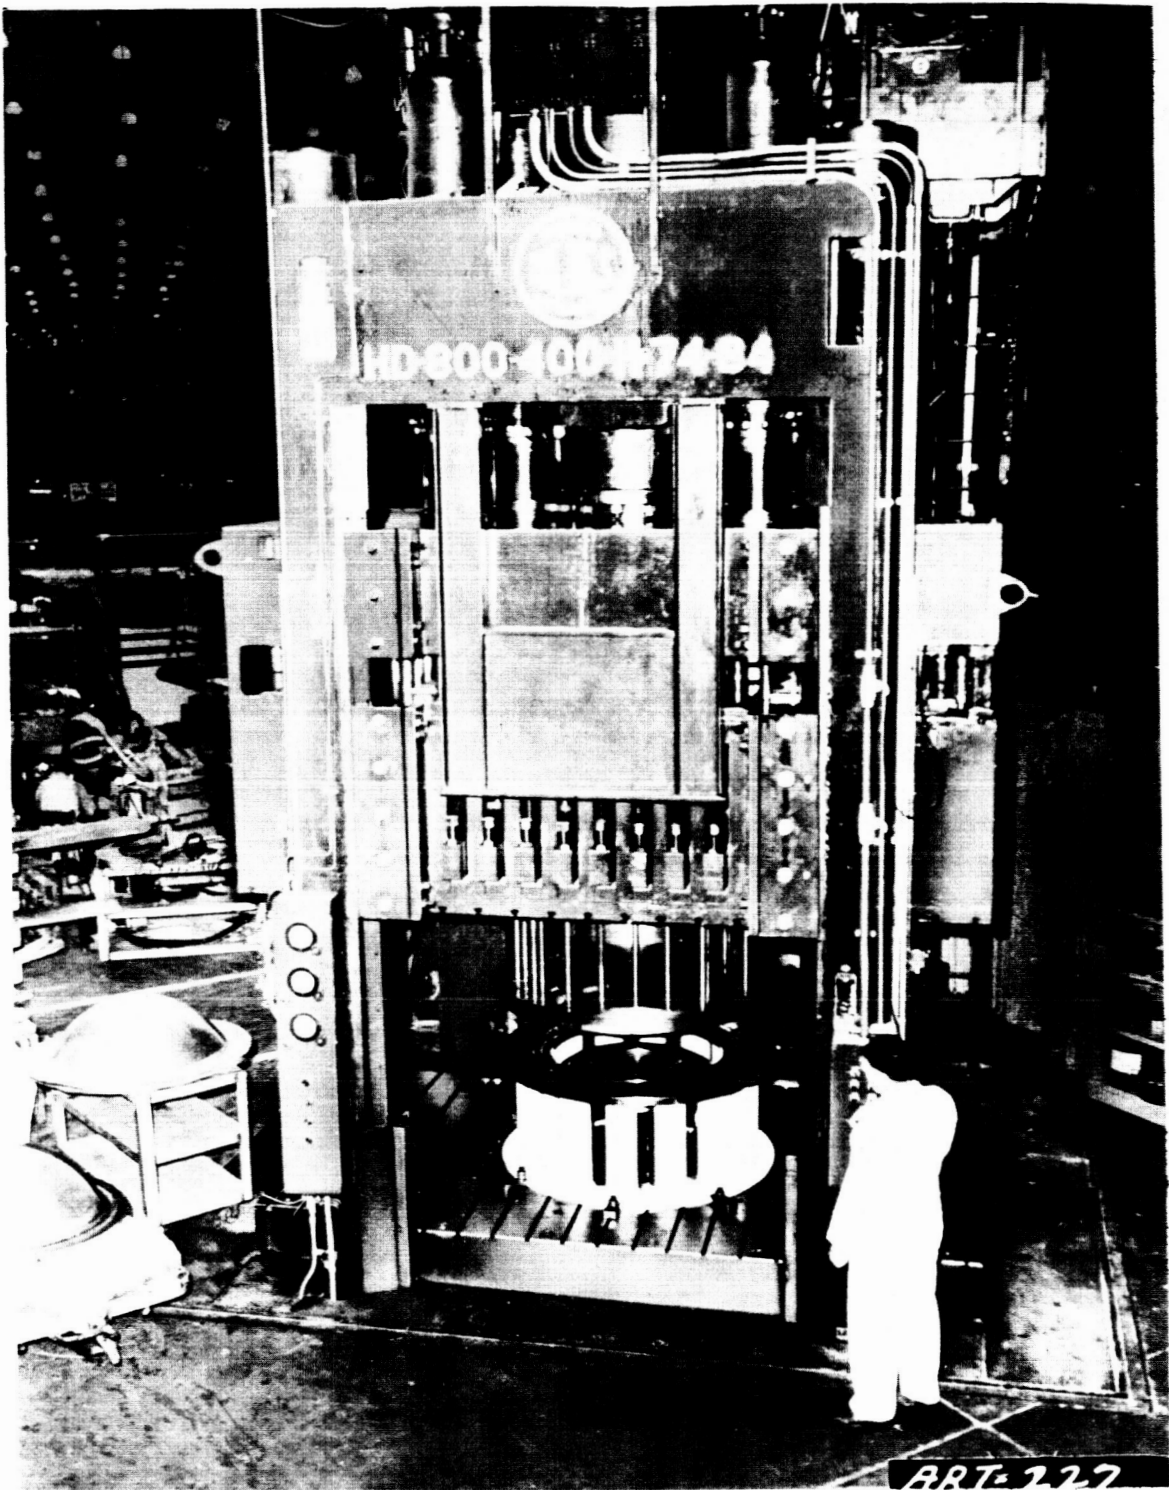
800-TON DOUBLE-ACTION HYDRAULIC PRESS DEEP DRAWING 52-INCH-DIAMETER HEMISPHERICAL ALUMINUM SHELLS (REF. 63)
